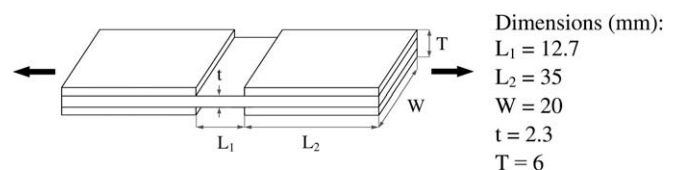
Geometry and dimensions of symmetric and balanced $\pm 45^\circ$ composite specimens under tensile loading.
